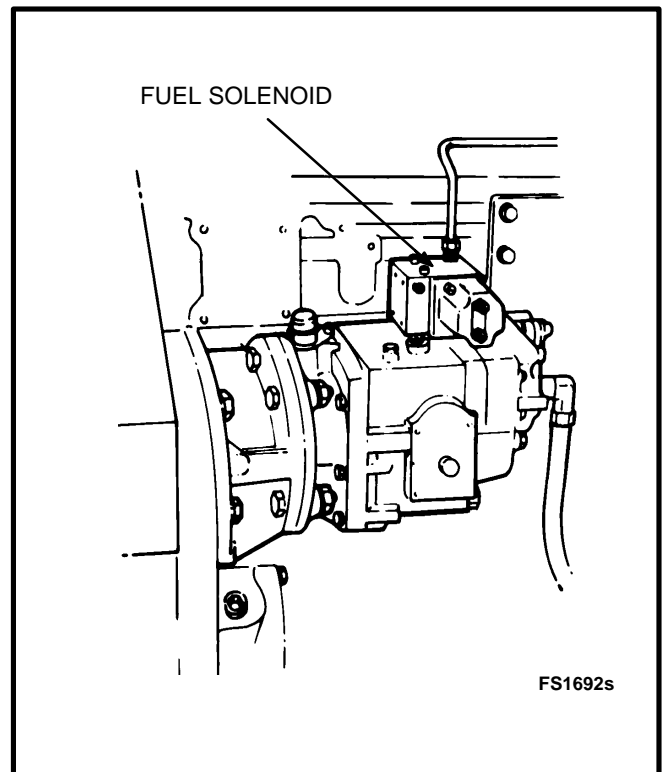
FUEL SOLENOID VALVE LOCATION
